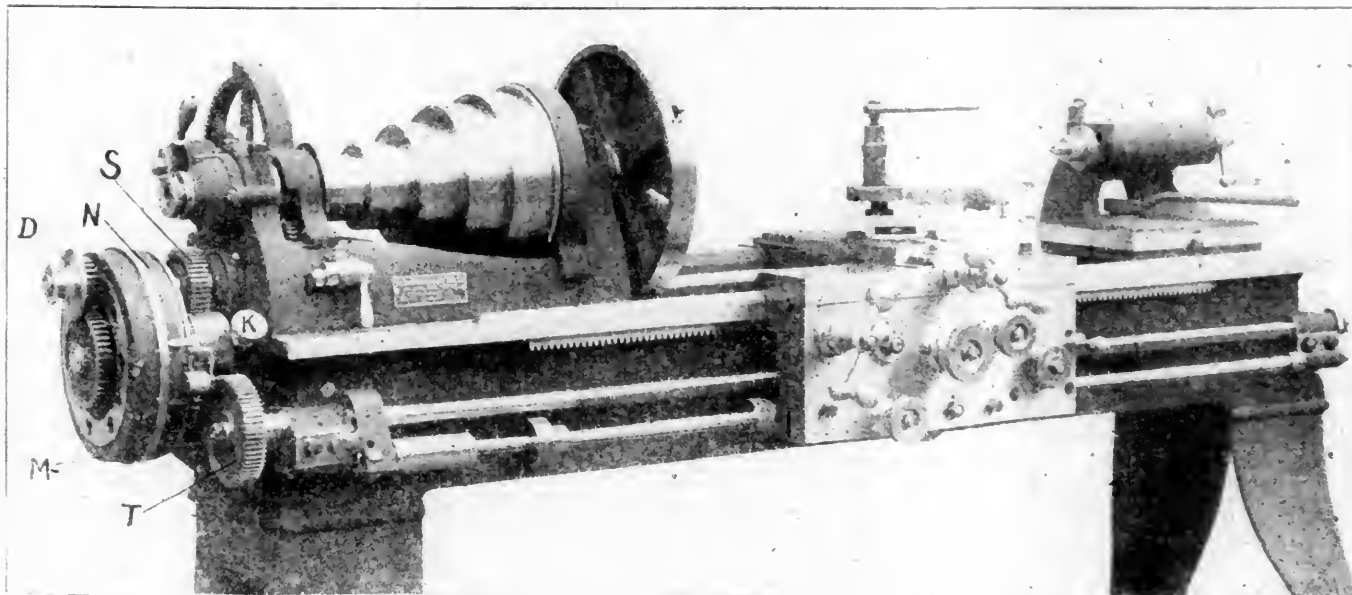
VIEW OF THE FEEDING ATTACHMENT MOUNTED UPON AN ENGINE LATHE OF THE BRADFORD MACHINE TOOL CO. MACHINE TOOL PROGRESS.—SCHELLENBACH FEEDING ATTACHMENT.
